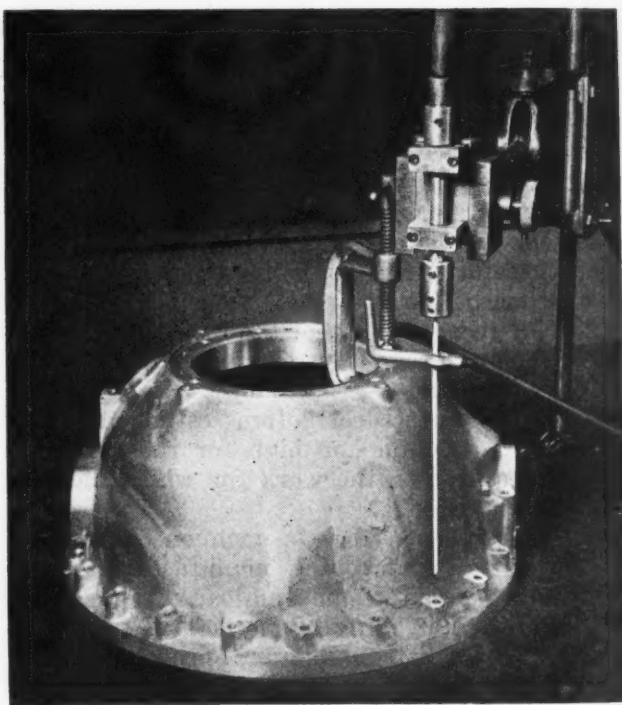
Fixture for Holding Stainless-steel Welding Rod, with Rod in Place
